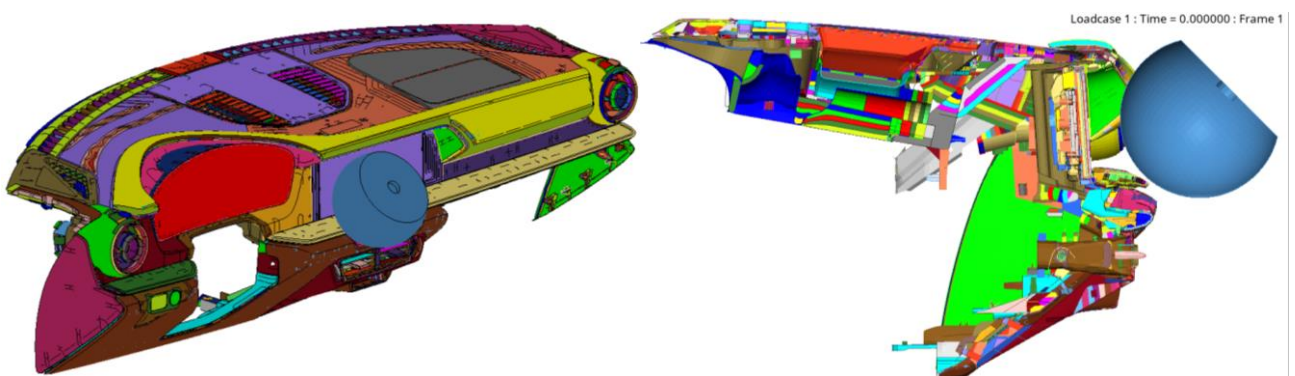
Full view and left side section of the head impact with modified rear cover (time 0 ms)
